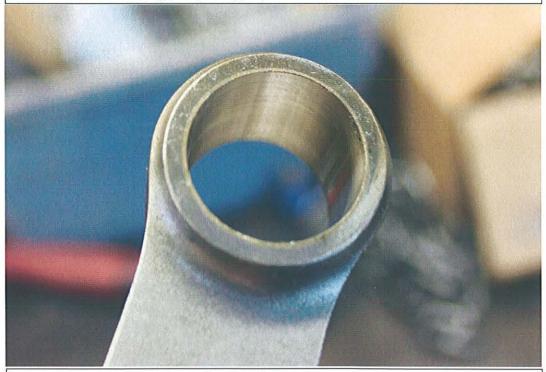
#378R: Minimal discoloration of piston pin bushing on cylinder #4 (image cropped)
